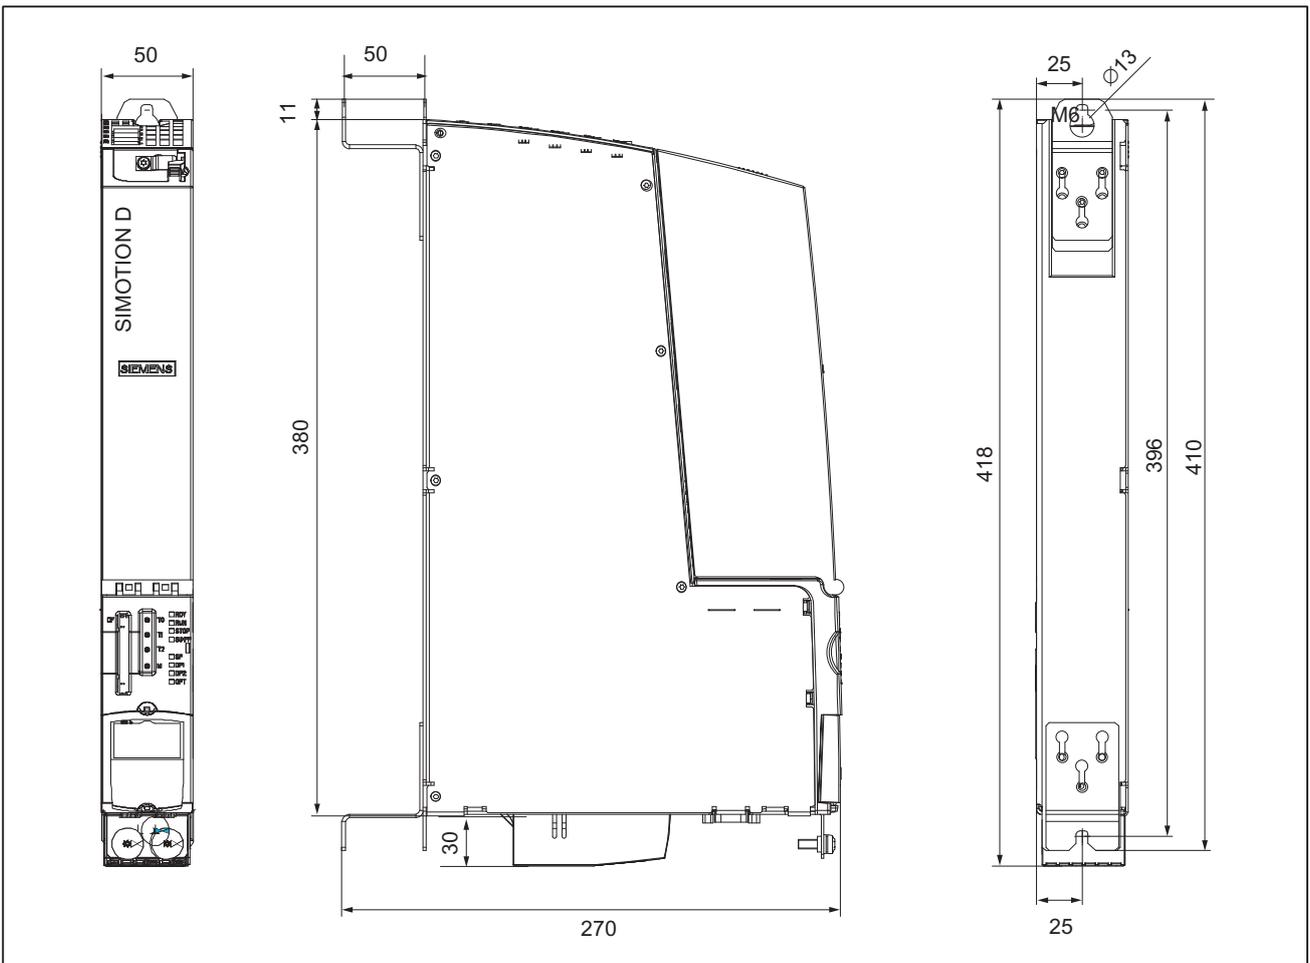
Dimension drawing of SIMOTION D425 and SIMOTION D435
